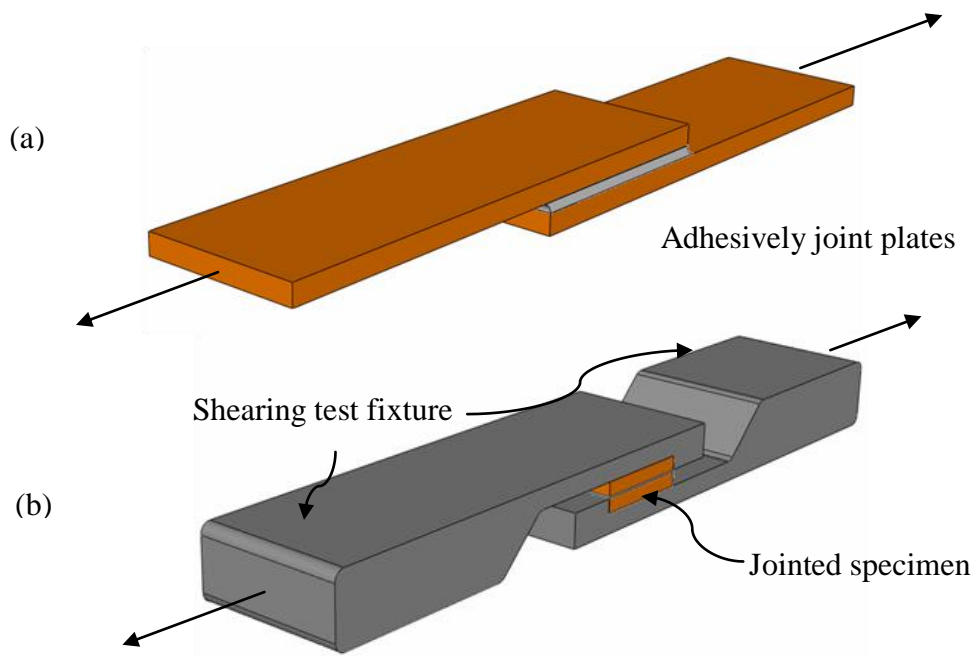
Lap shear test. (a) diagram of ASTM D1002 lap shear specimen [20] (b) the shearing test on selected adhesively joint section [22]
